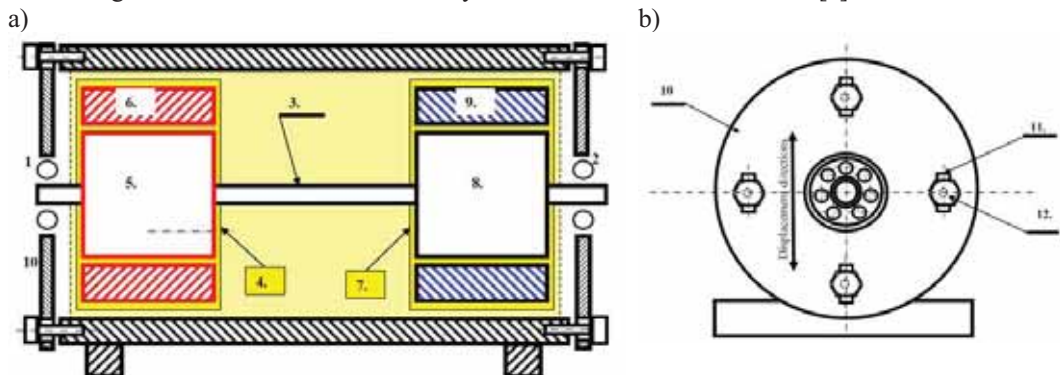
Simplified assembly drawing of electro-mechanical converter adjusted (in PAFTI) to introducing controlled assembling errors : a) longitudinal section, b) view from the side of side cover bearing disc. 1, 2 – rolling bearing, 3 – shaft, 4 – DC motor, 5 – rotor of DC motor, 6 – stator of DC motor, 7 – AC generator, 8 – rotor of AC generator, 9 – stator of AC generator, 10 – bearing disc (side cover), 11 – vertically milled grooves, 12 – fastening bolt.
